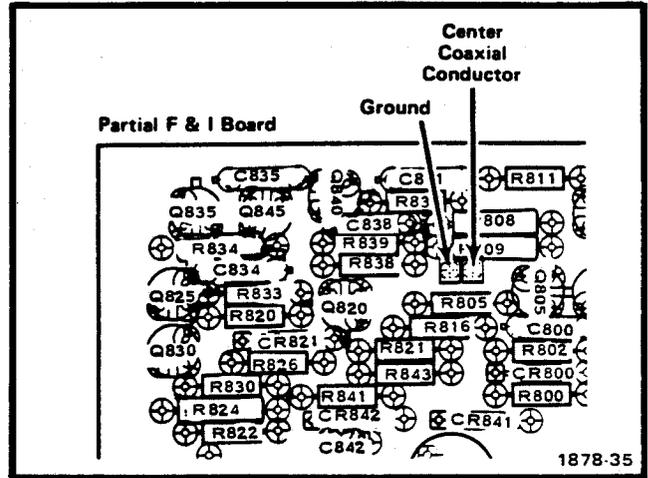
Location of auxiliary Z-axis input solder pads.
